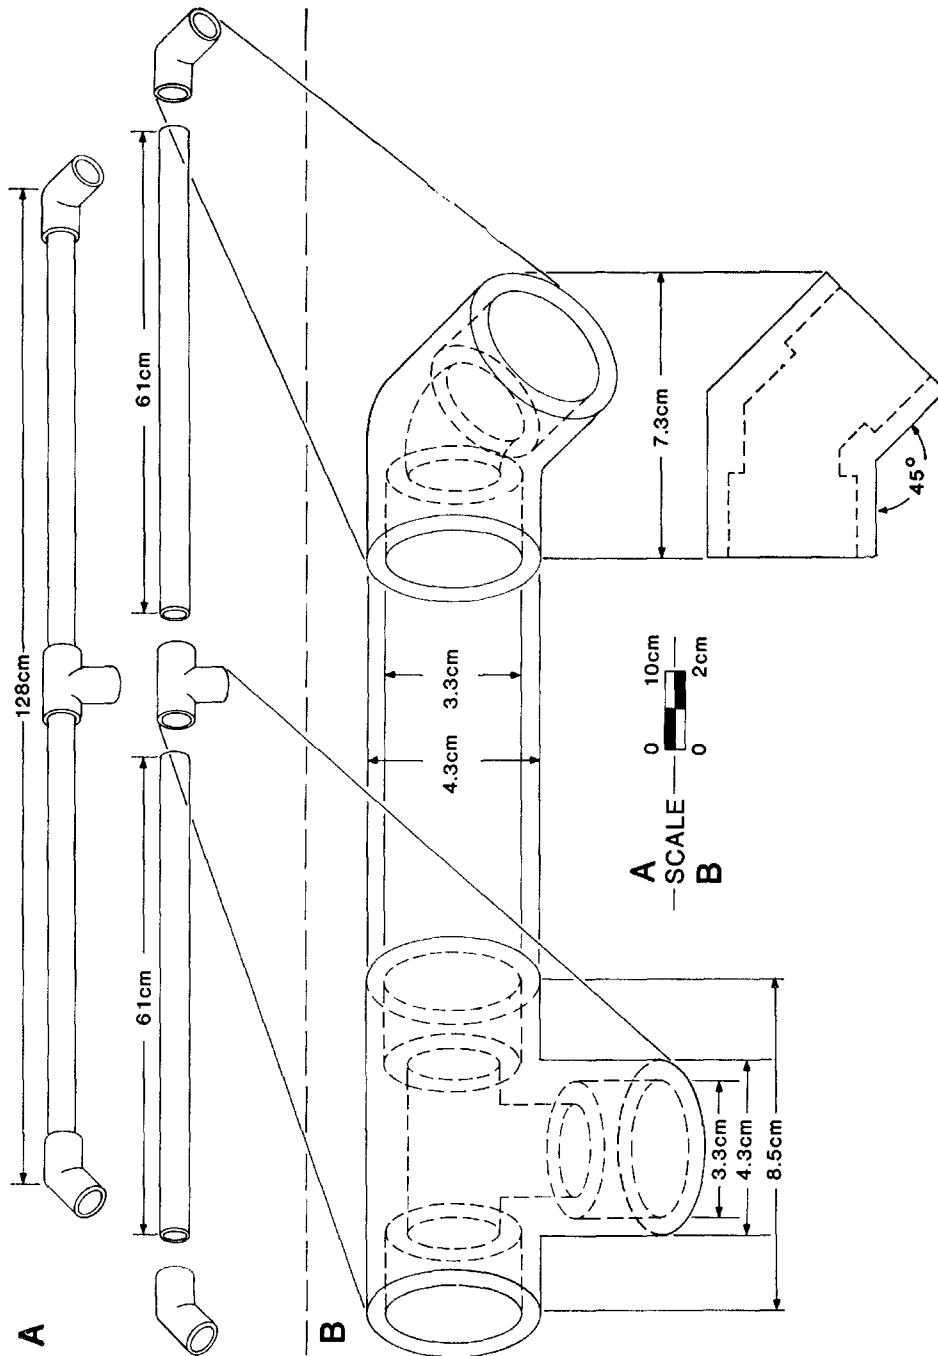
Ring sections of supporting frame showing how polyvinylchloride pipe and connections are assembled.
